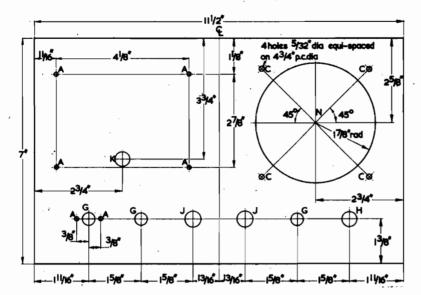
Drilling dimensions for the front panel. Hole diameters are indicated in the Table. The material is 16 s.w.g. aluminium. The mounting holes for the speaker may vary in position from those indicated here
